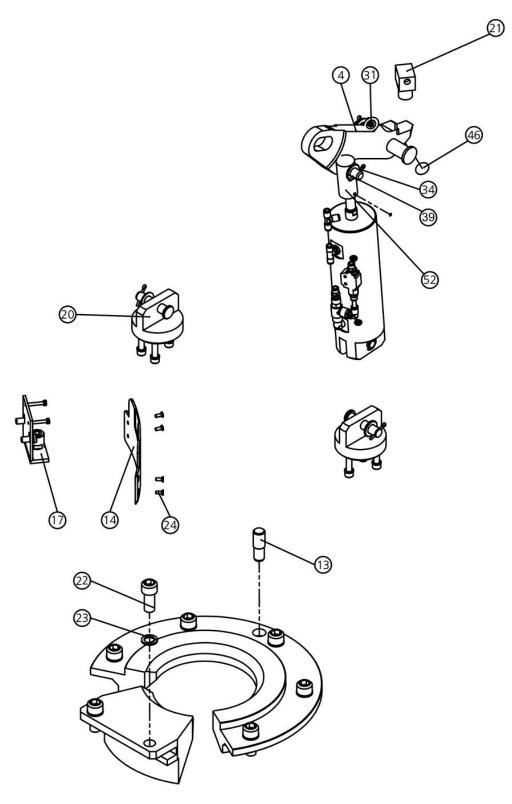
Principle drawing of a FMS-500-AIR part 4
